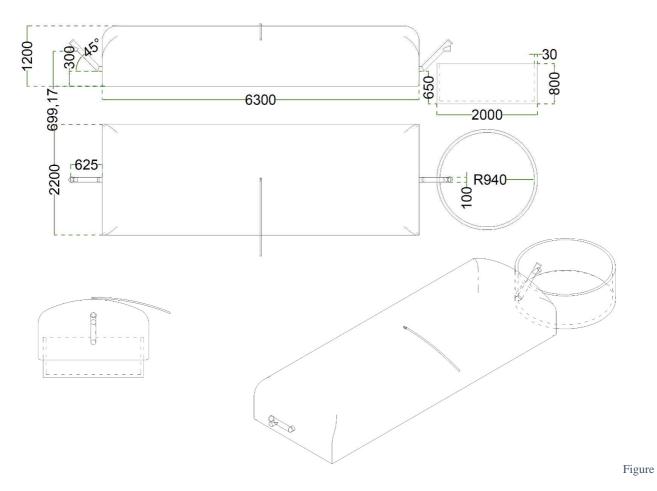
Technical drawing digester 7.5 $\ensuremath{m^3}$
